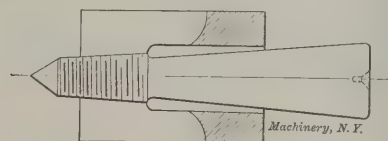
Spring Screw Die Mounted on Threaded Arbor for Grinding.
